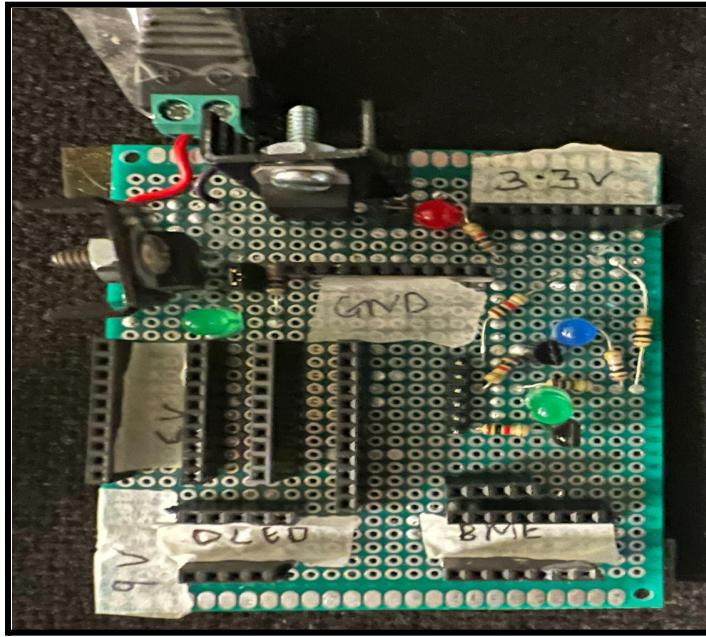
Solderless breadboard Version of Mining Environment Inspection Module
